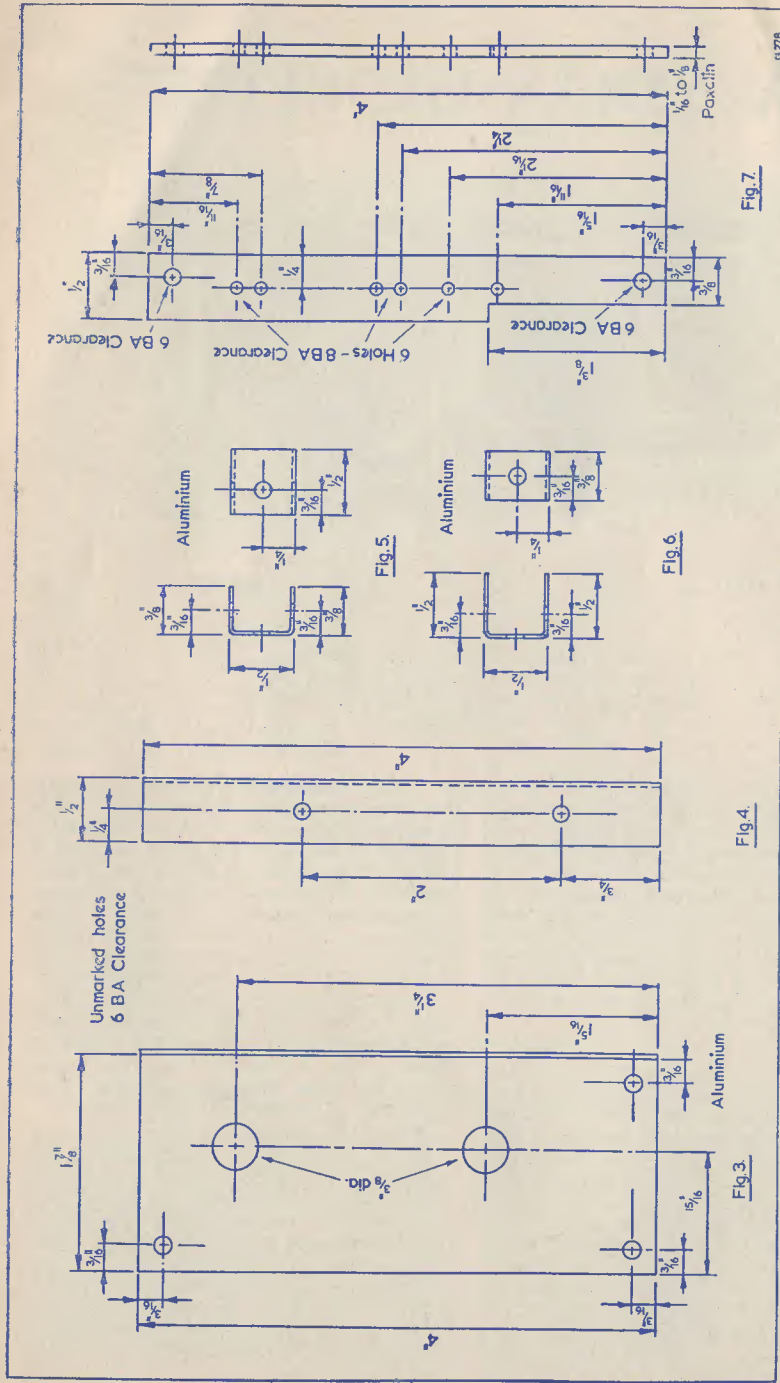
Front view of the main chassis of the Transistorette. The material is 14 to 18 s.w.g. aluminium sheet, and all holes are 6-BA clearance (No. 32 drill) unless otherwise stated. Fig. 4. Side view of the main chassis. The two holes are 6-BA clearance. Fig. 5. The "inner" bracket. The material is 14 to 18 s.w.g. aluminium and all three holes are 6-BA clearance. Fig. 6. The "outer" bracket. This uses the same material and has the same diameter holes as the bracket of Fig. 5. Fig. 7. The dimensions of the condenser-support strip. The 8-BA clearance holes shown may be made with a No. 41 or 42 drill
